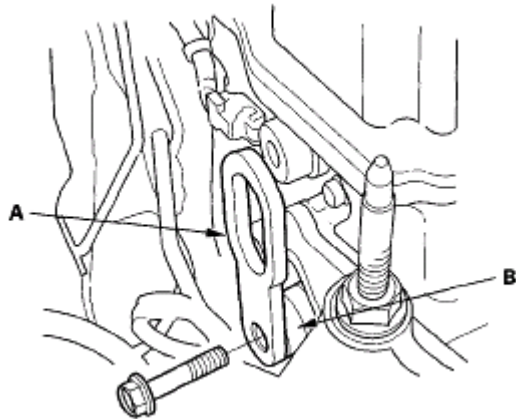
Identifying Side Engine Mount Bracket Bolts
